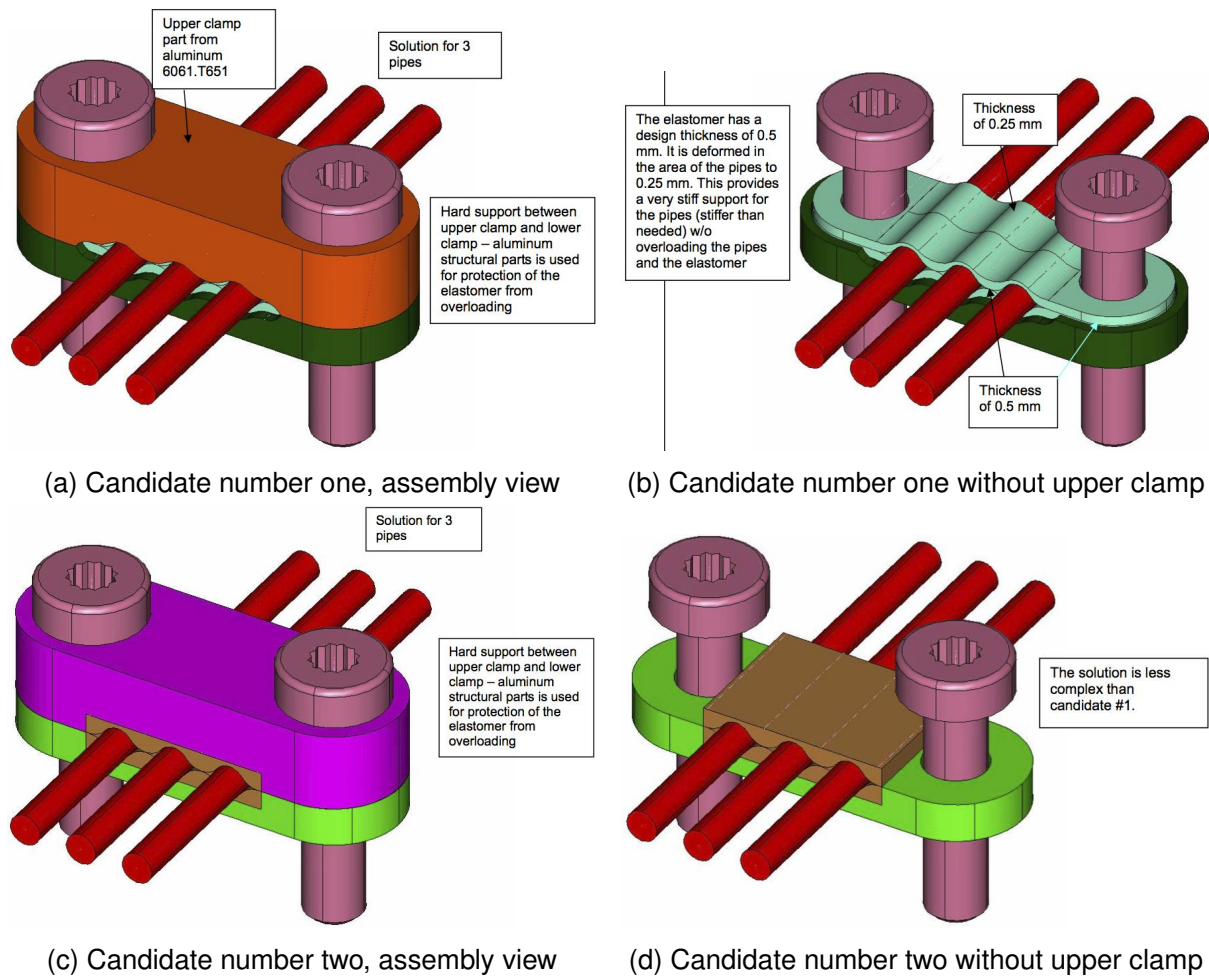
Clamp part support for the fuel supply pipework<sup>61</sup>
